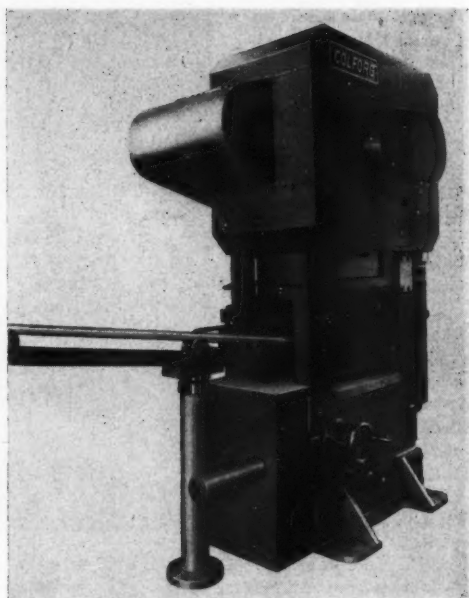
Colforg cropping machine for cutting slugs for cold forging from steel bar
